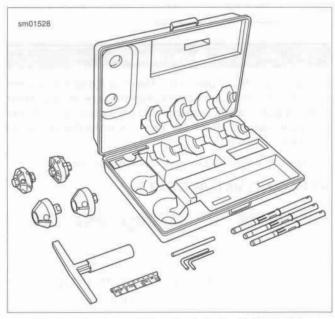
Neway Valve Seat Cutter Set (Part No. HD-35758-C)
